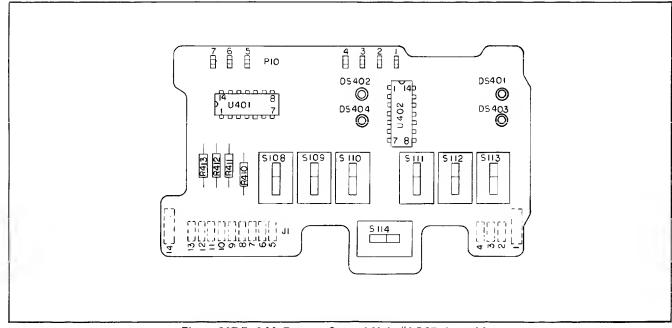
A11 Remote Control Unit #1 PCB Assembly
